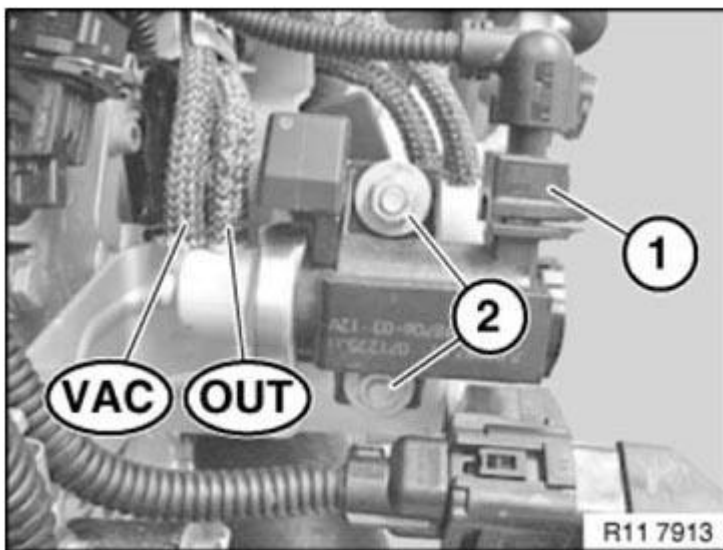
Identifying Black/Red Vacuum Hose And Plug Connection
